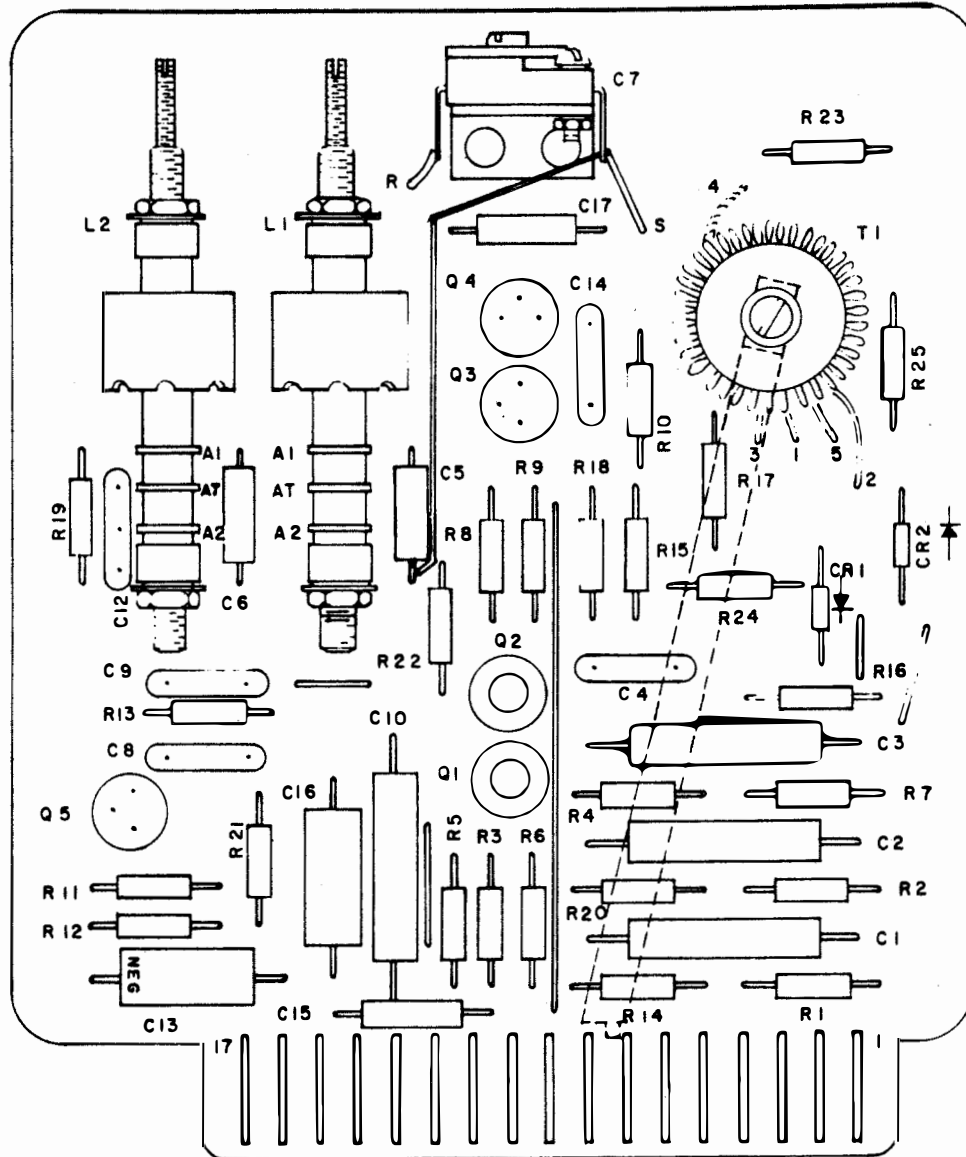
P. W. Board Assembly (A4 R. F. Amp.
